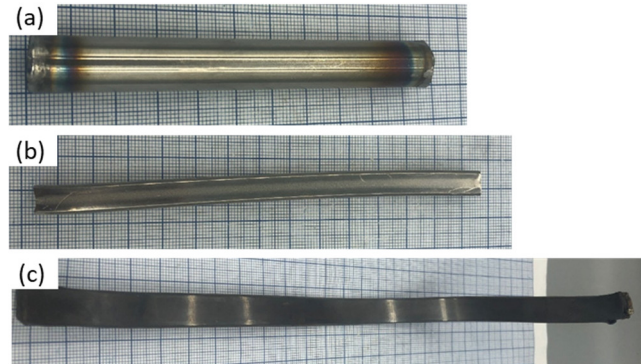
Photo showing the powder-packed stainless steel tube sample in different processing steps. (a) after filling and sealing; (b) after combination cold rolling; (c) after hot rolling. The grid spacing is 10 mm.
